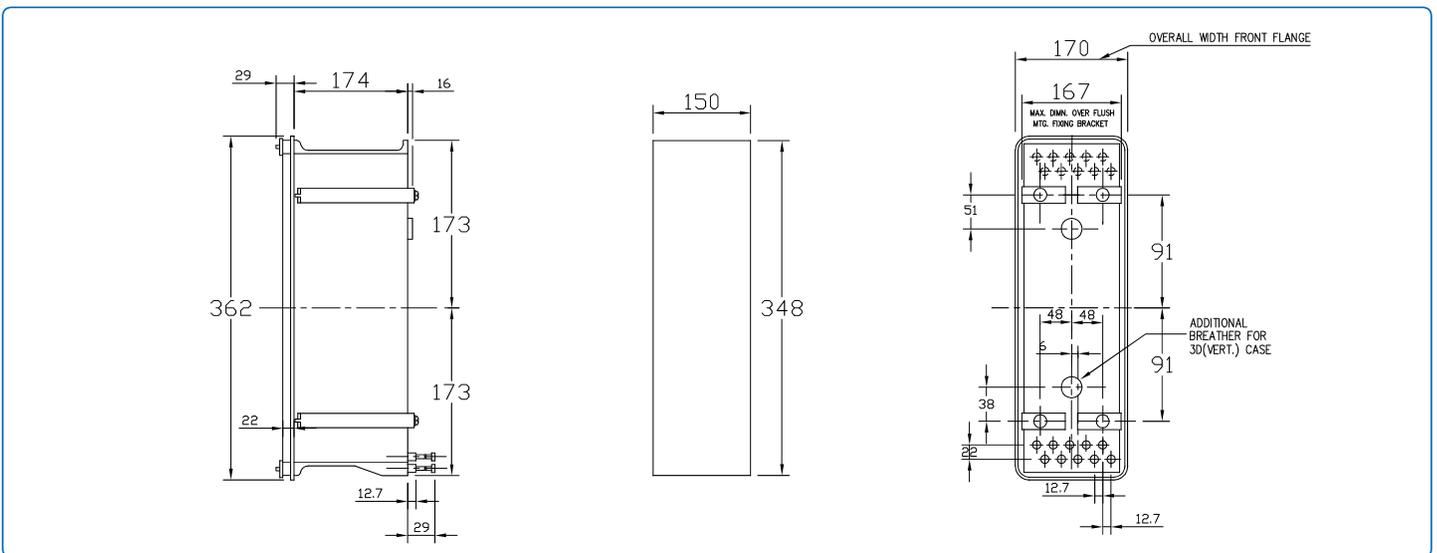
Case and Panel cut-out dimensions for case 1 1/2D (all dimensions in mm)
